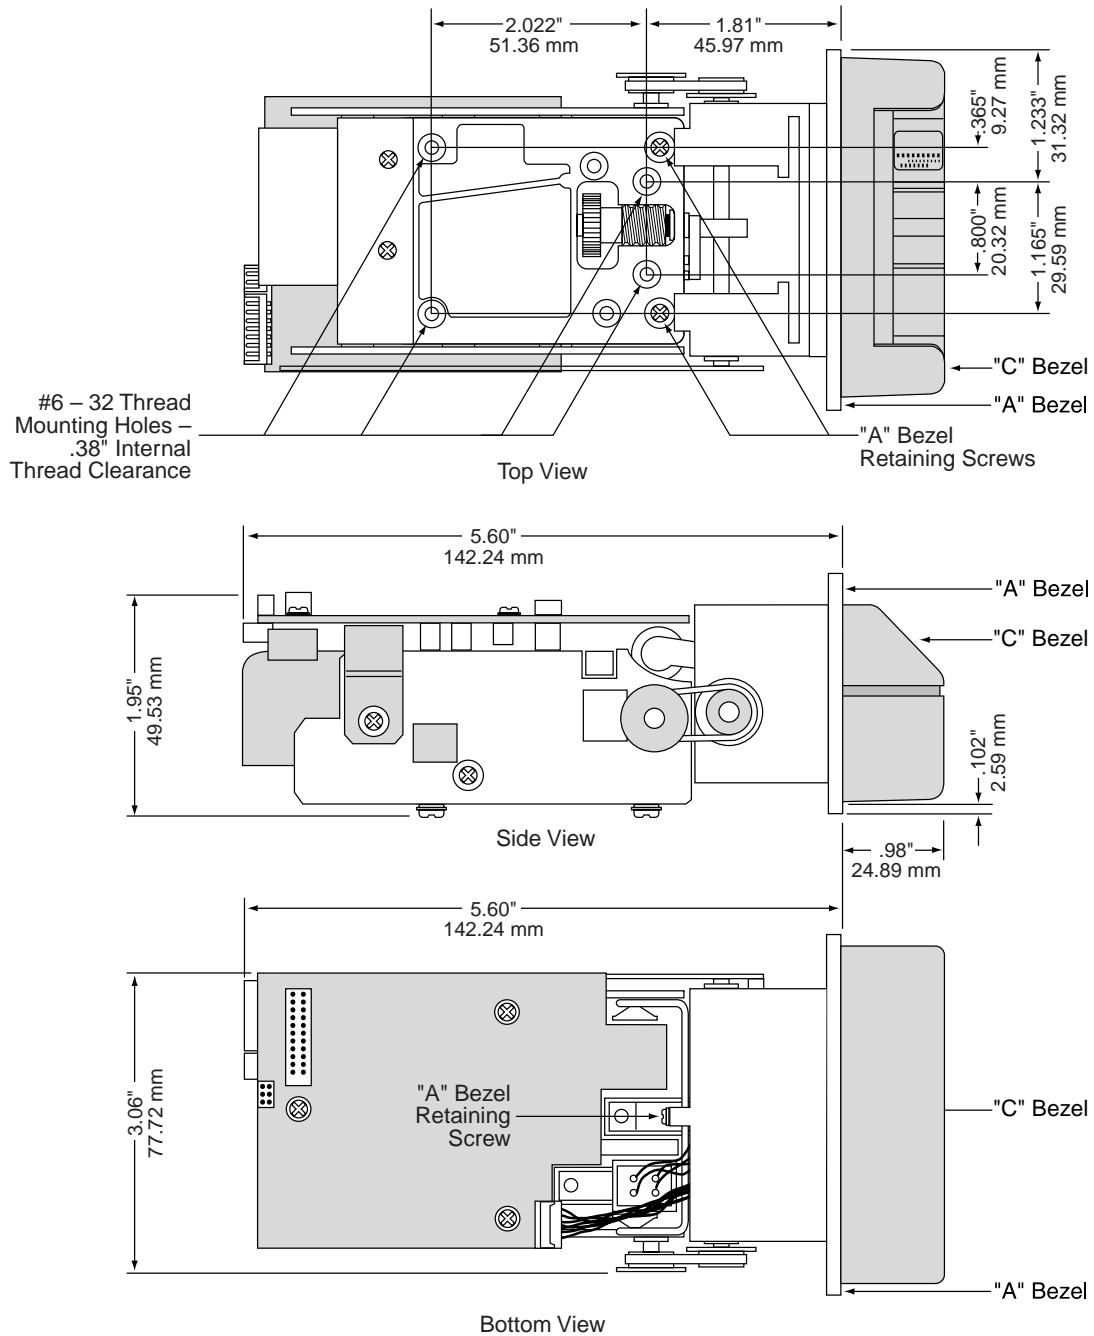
“C” Bezel Mounting – Top, Side, and Bottom Views
